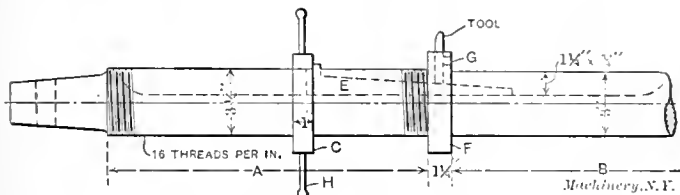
Special Boring-bar for Taper Boring or Groove Cutting
